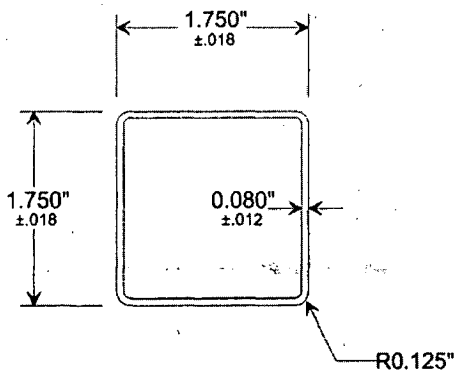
FALCON AND LXT GUARDRAIL SYSTEM COMPONENT PROFILES
